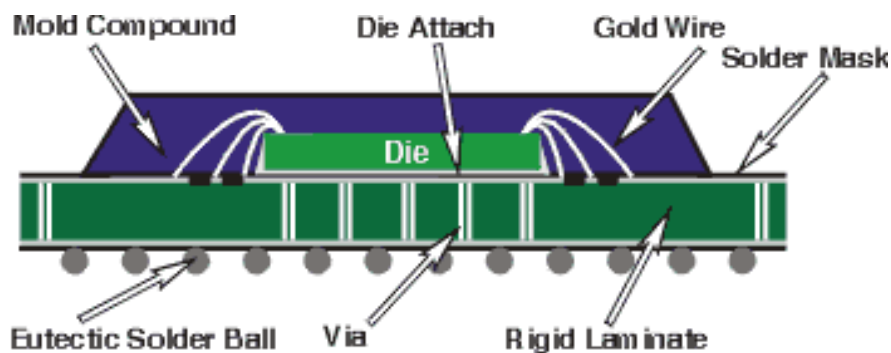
Cross-Sectional View of typical PBGA on PCB
